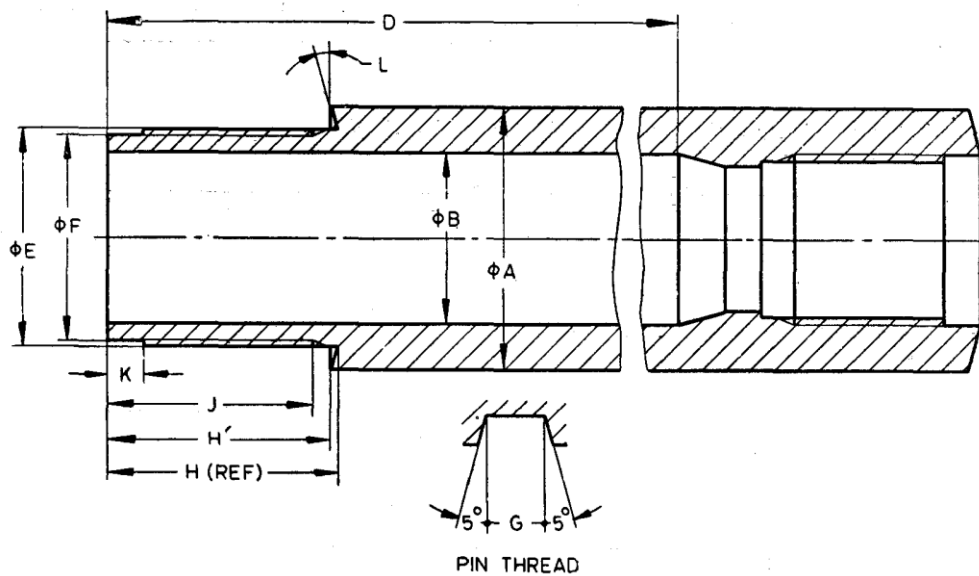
'WG' DESIGN SINGLE TUBE CORE BARREL — TUBE
